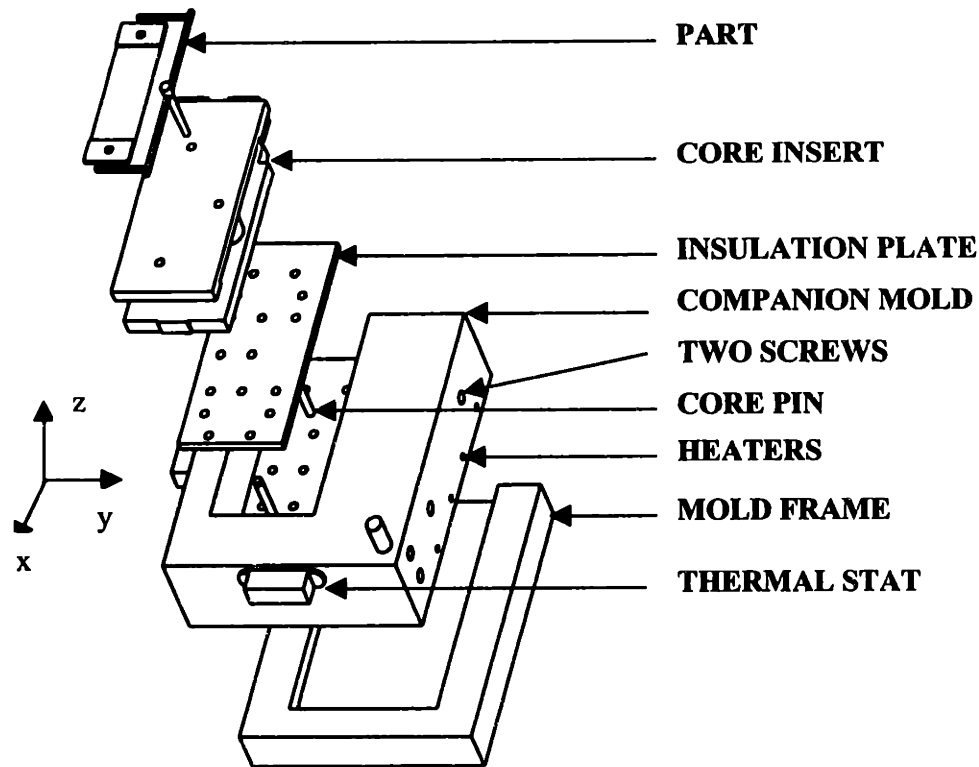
B-side mold frame assembly for rapid thermal cycling test
